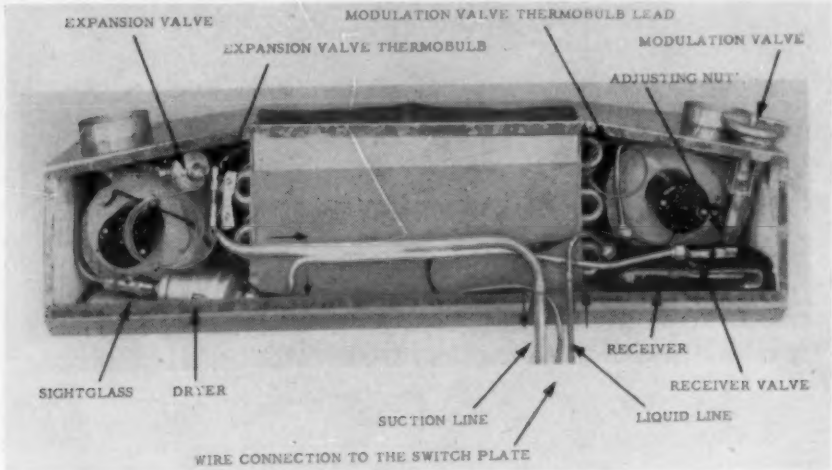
Location of components in Pivot evaporator-blower assembly is readily seen in this photo.
